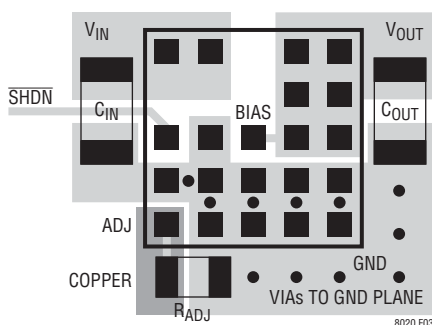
Layout showing suggested external components, GND plane and thermal vias
